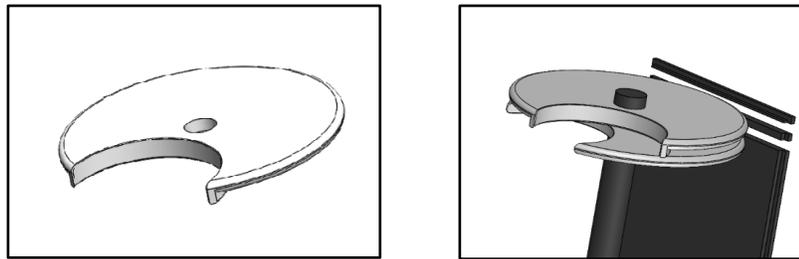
Carousel Disc and its Assembly with the Motor Driver
